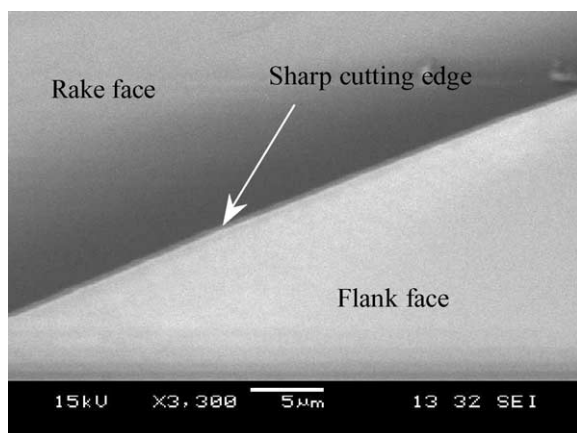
SEM photograph of the main cutting edge of a diamond tool.
